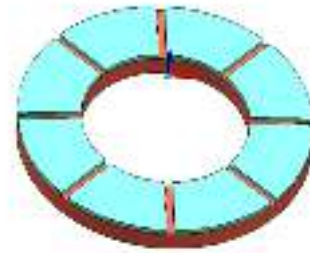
Initially designed rotor disc of Axial Flux PM motor
